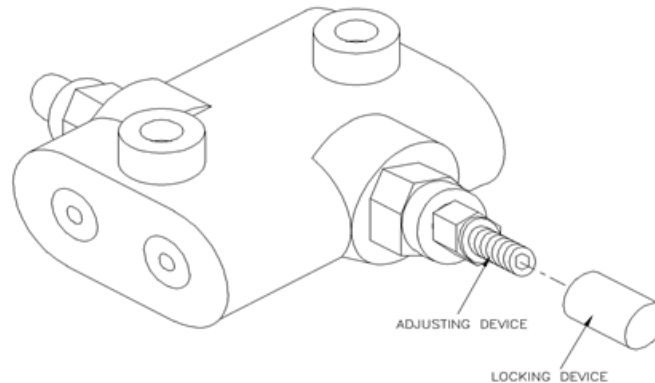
ADJUSTING THE CUSHIONING VALVE
